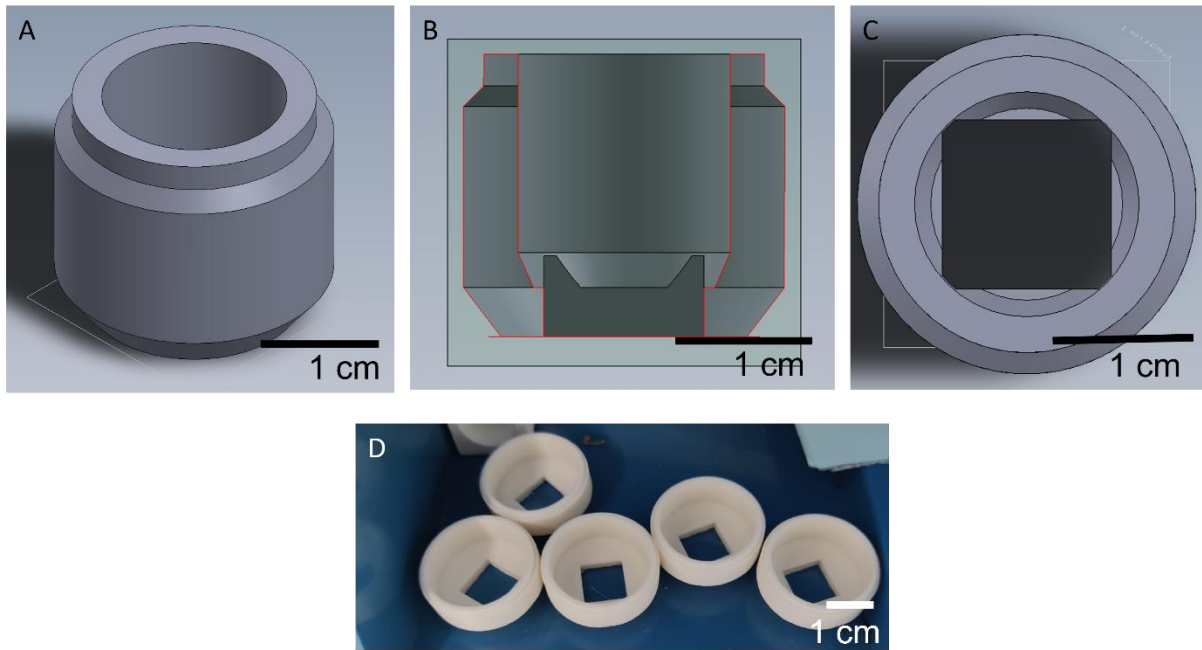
3D printed holder design for upright bioprinting of the osteochondral constructs. A) Shows an isometric view of the holder's CAD (Computer Aided Design). B) Shows side cross-section of the holder CAD design. C) Top view of the CAD holder. D) Photograph of 3D printed holders.
